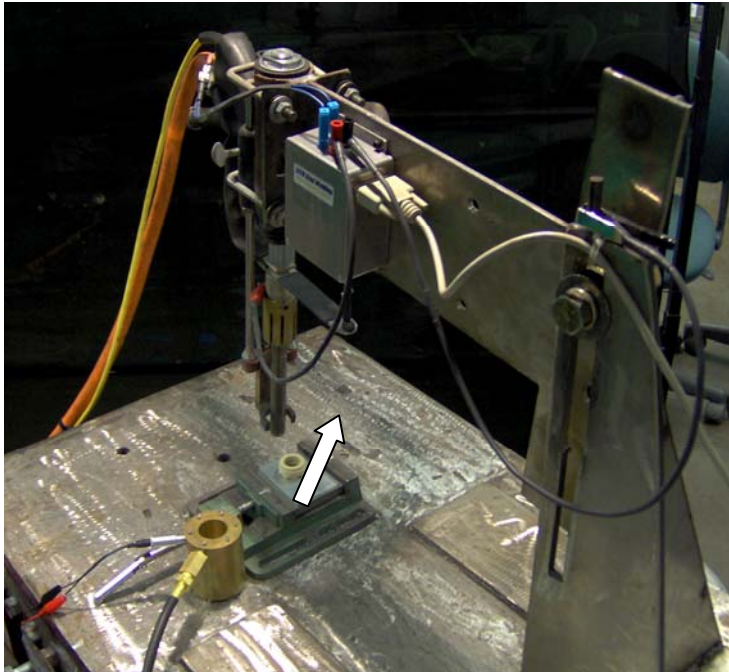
Stud welding fixture, fabricated to eliminate operator-induced, uncontrollable variables. Note the separate ACS coil, later to replace the centering device on the gun (arrow)
